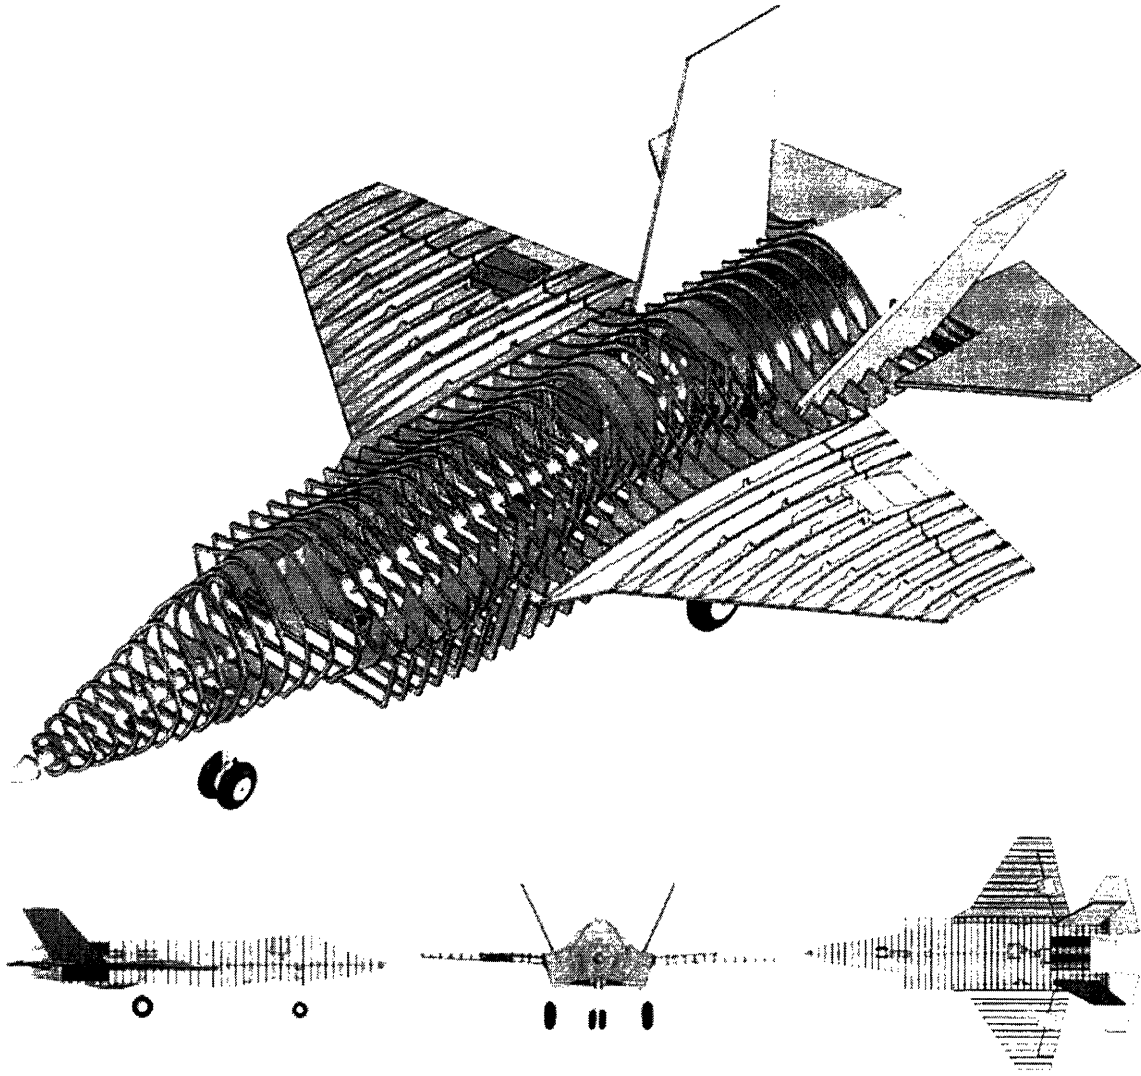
Isometric, side, front, and top views of the F-35A solid model assembly.
